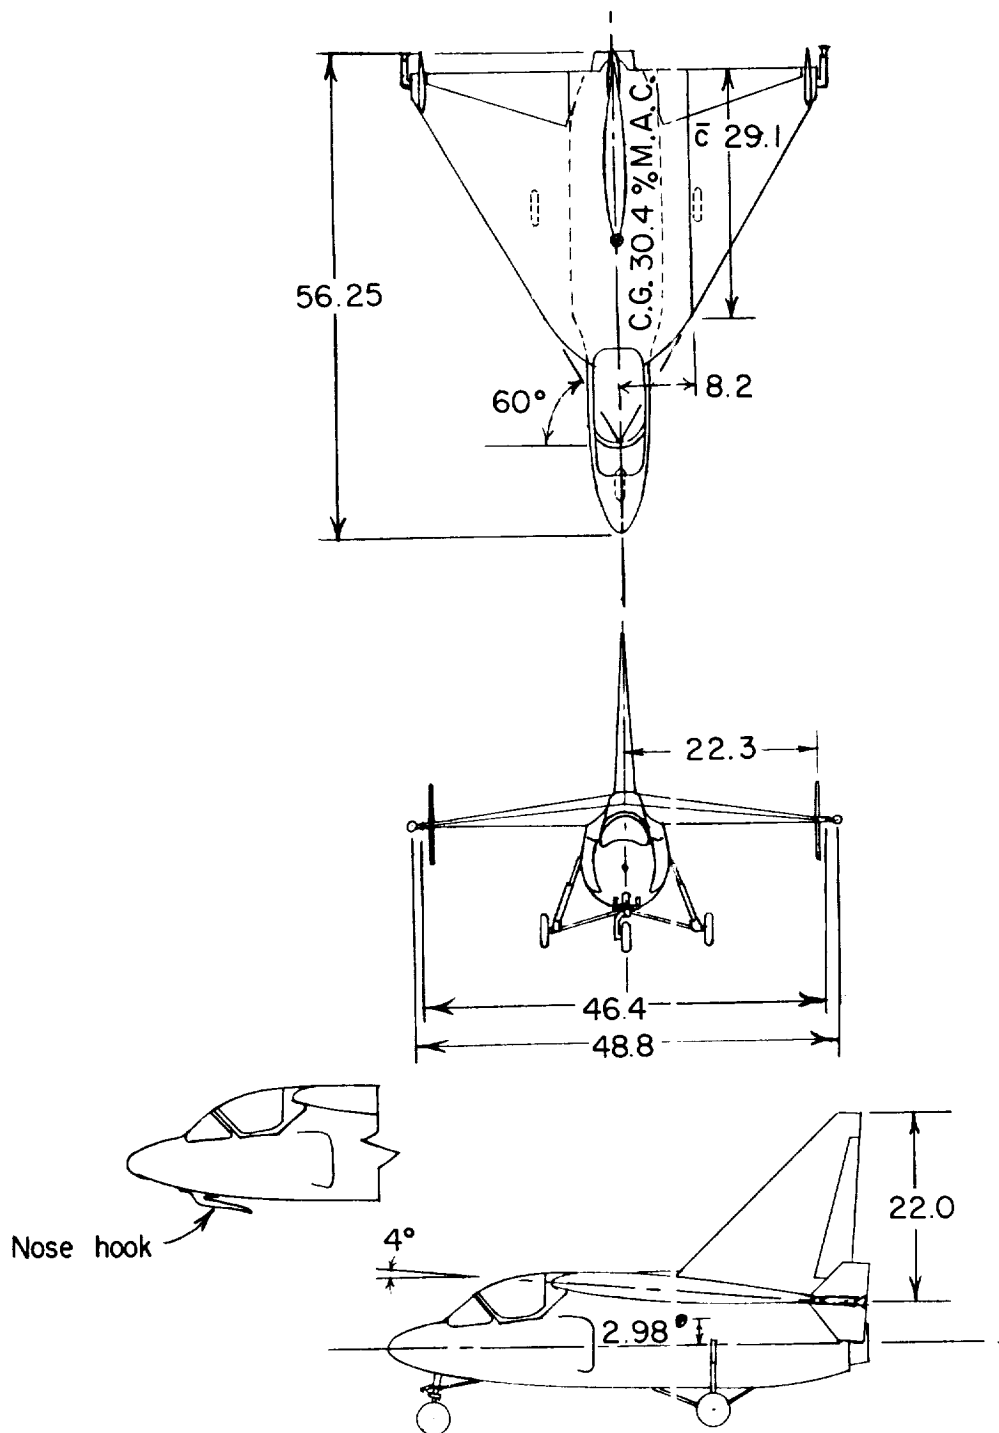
Three-view sketch of the model used in the tests. All dimensions are in inches unless otherwise indicated.
